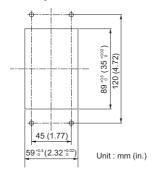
Panel Cut-out Dimensions (Internal/Flush-mount Installation)
